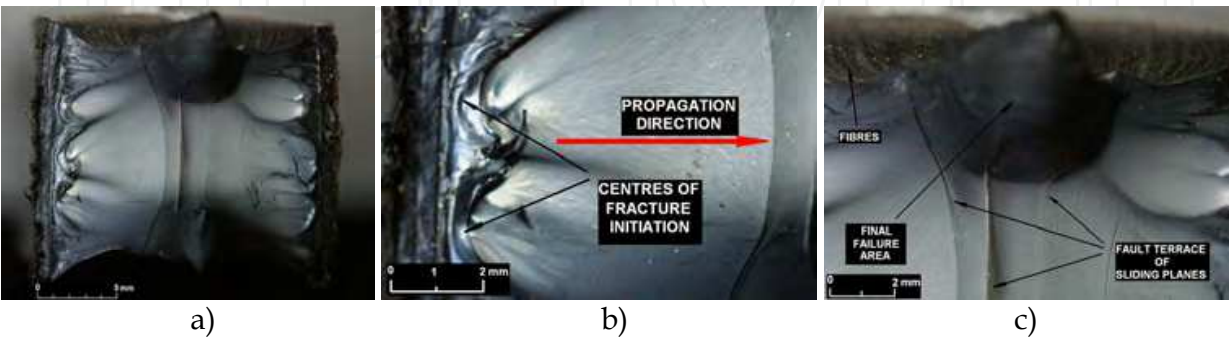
The breaking surface of a sample with bilateral V notches with  $h=1\text{mm}$  depth and  $v=650\text{ mm/min.}$ ; a - failure surface, b - aspect of the fracture initiation zone, c - aspect of the final fracture zone.
